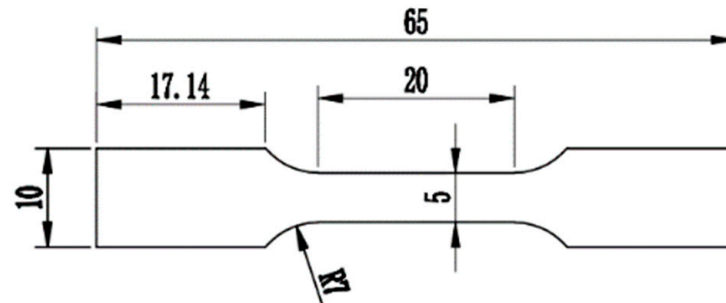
Dimensions of sample in millimeters (mm) for tensile specimens (thickness is 1 mm).
